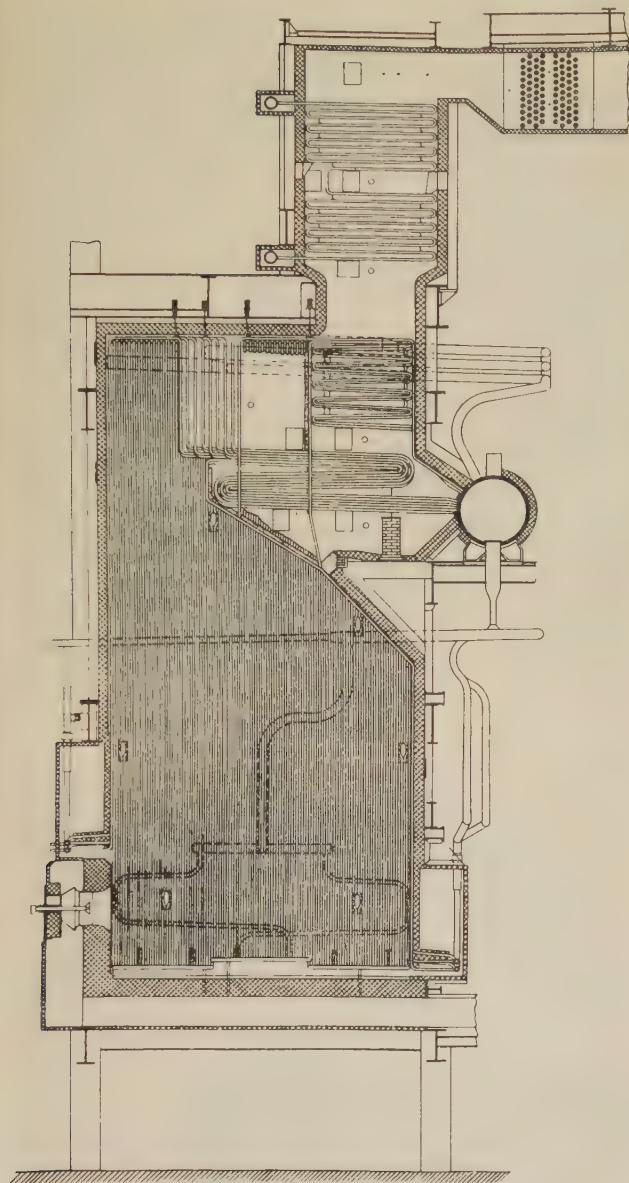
CROSS SECTION OF 15,000-Kw MERCURY BOILER
